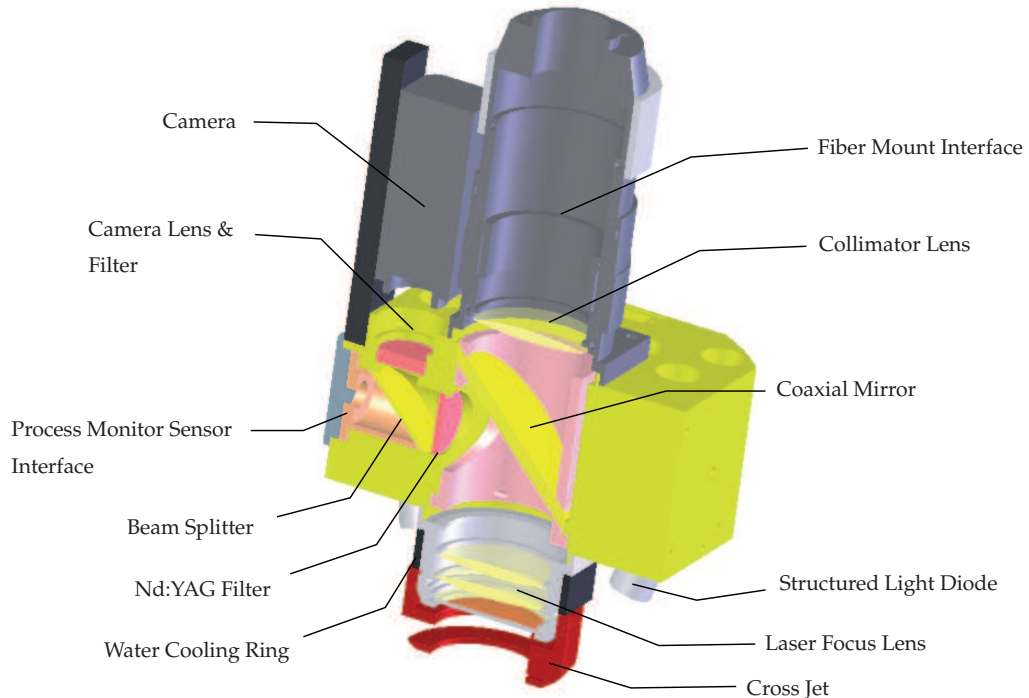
A section of the mechanical design of the welding head. The optical path of Fig.3.6 is clearly visible.
